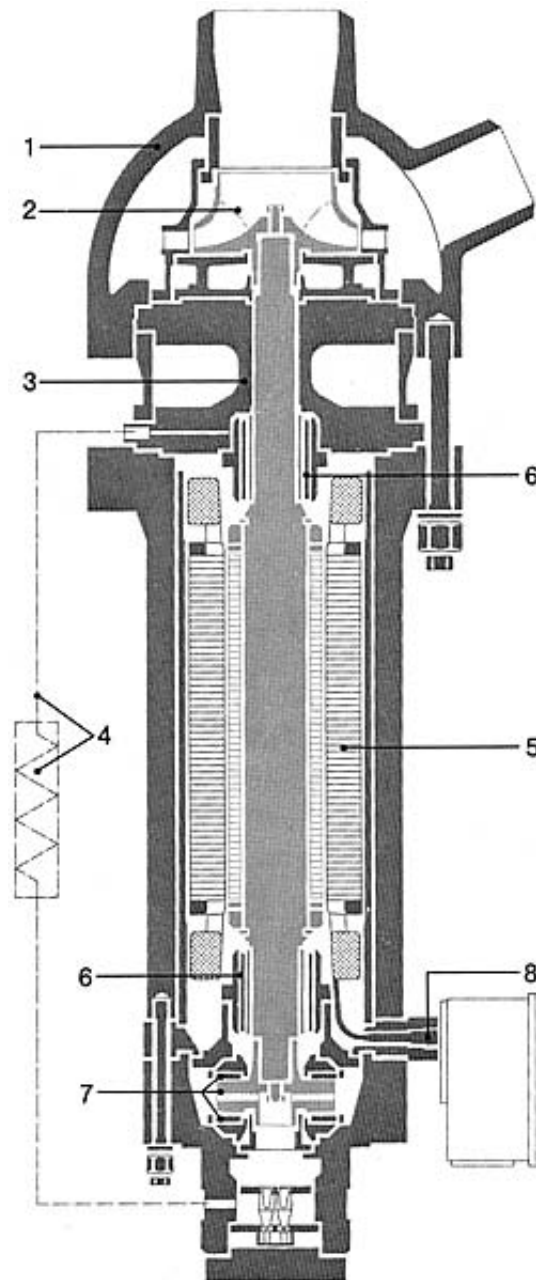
Glandless circulating pumps with wet rotor motor and air-cooled heat barrier for steam power stations (cf. Fig. 2 under wet rotor motor)
